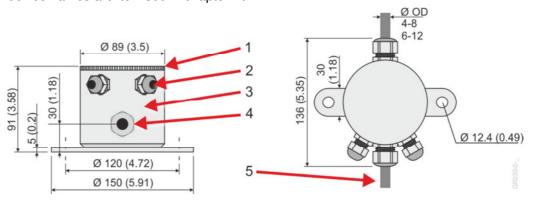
Technical specifications and mechanical structure of Flow-Guard S...T Dimensions in mm (.in)
